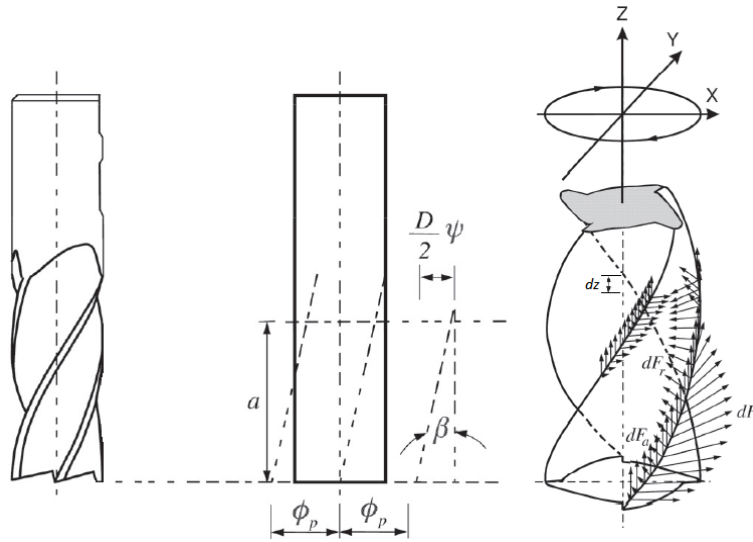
Helical milling cutter geometry. Adapted from [16]
